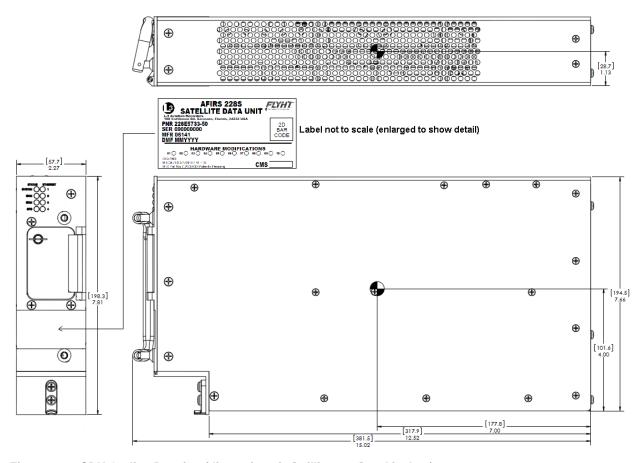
SDU Outline Drawing (dimensions in [millimeters] and inches)
